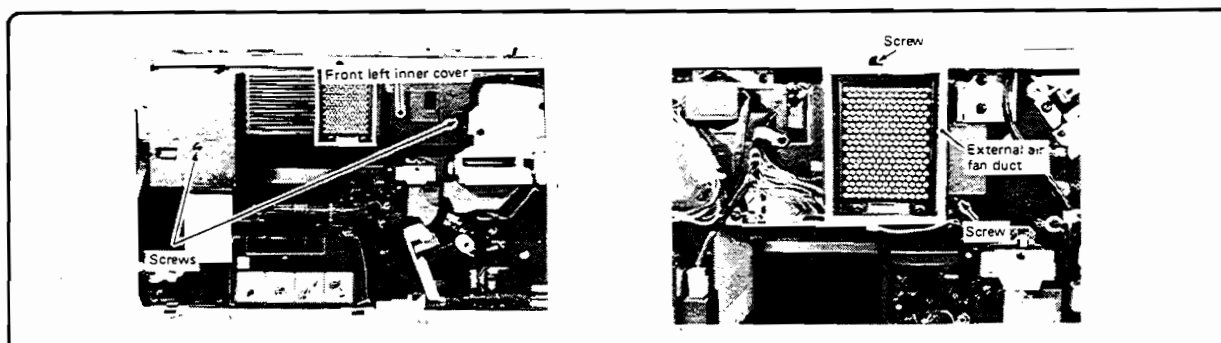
Engine-FM6 External Cover and Fan Duct
